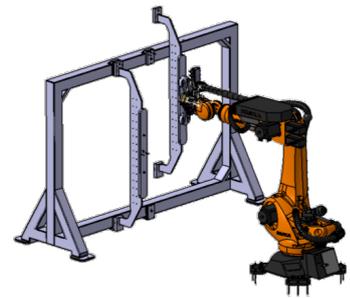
PnP process: Robot load and unload profile boards onto the jig frame
